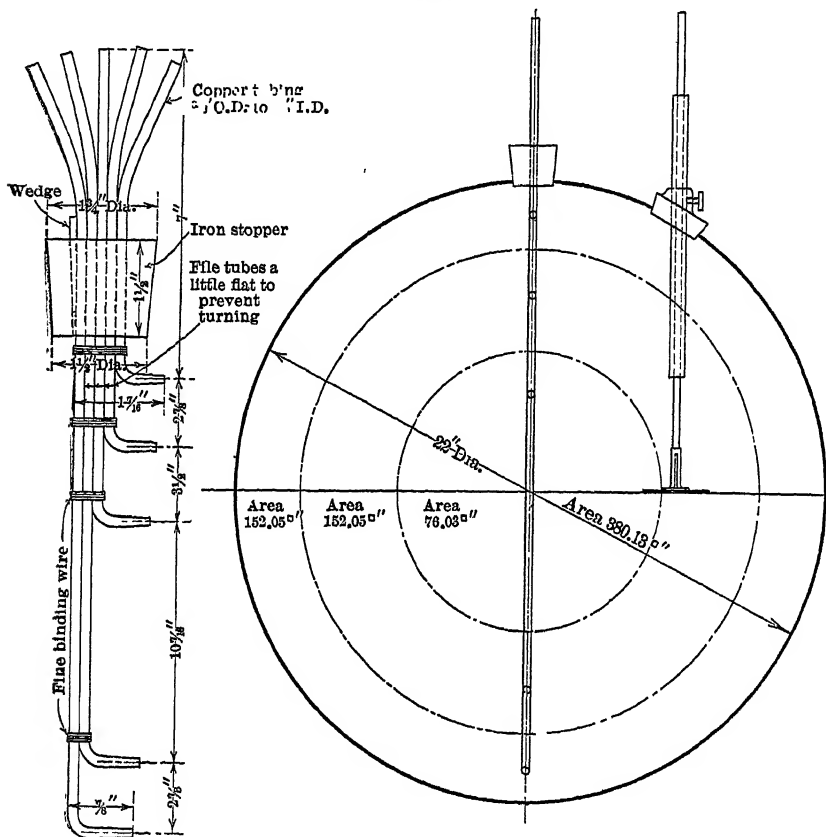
PLATE IV.—IMPACT END OF PITOT TUBE FOR 22-IN. PIPE.
